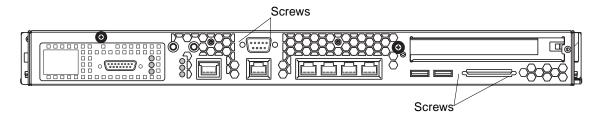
Removing the SCSI and Serial Port Screws
